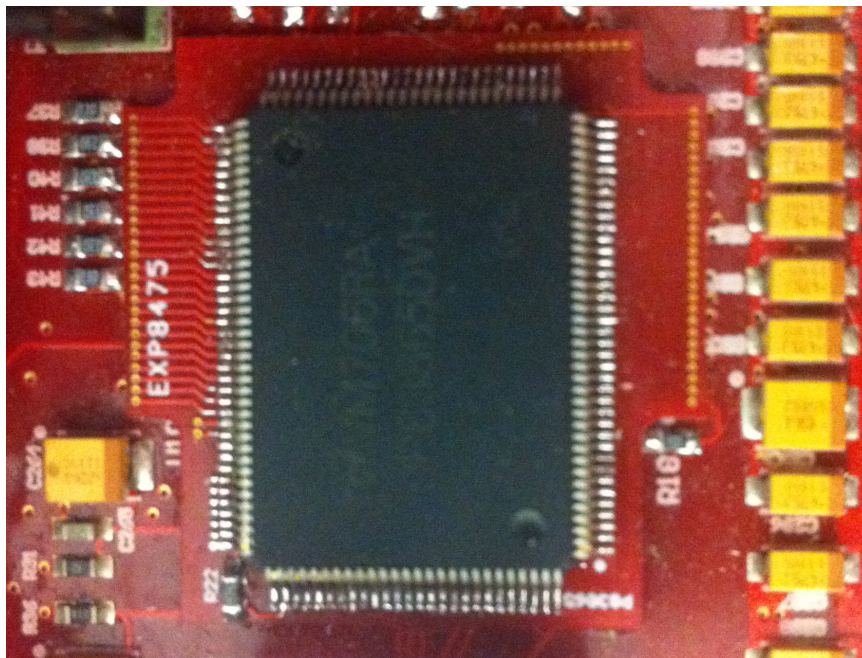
Figure illustrating the Ethernet device fitted to the pin translation PCB due to an incorrect main PCB footprint
